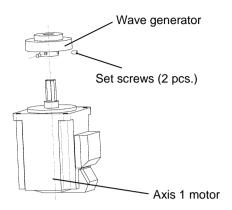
Dismounting axis 1 wave generator (KHL-300, KHL-400)
